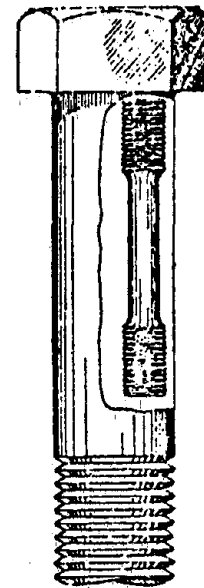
Location of Standard Round 2-in. Gage Length Tension Test Specimen When Turned from Large Size Bolt
